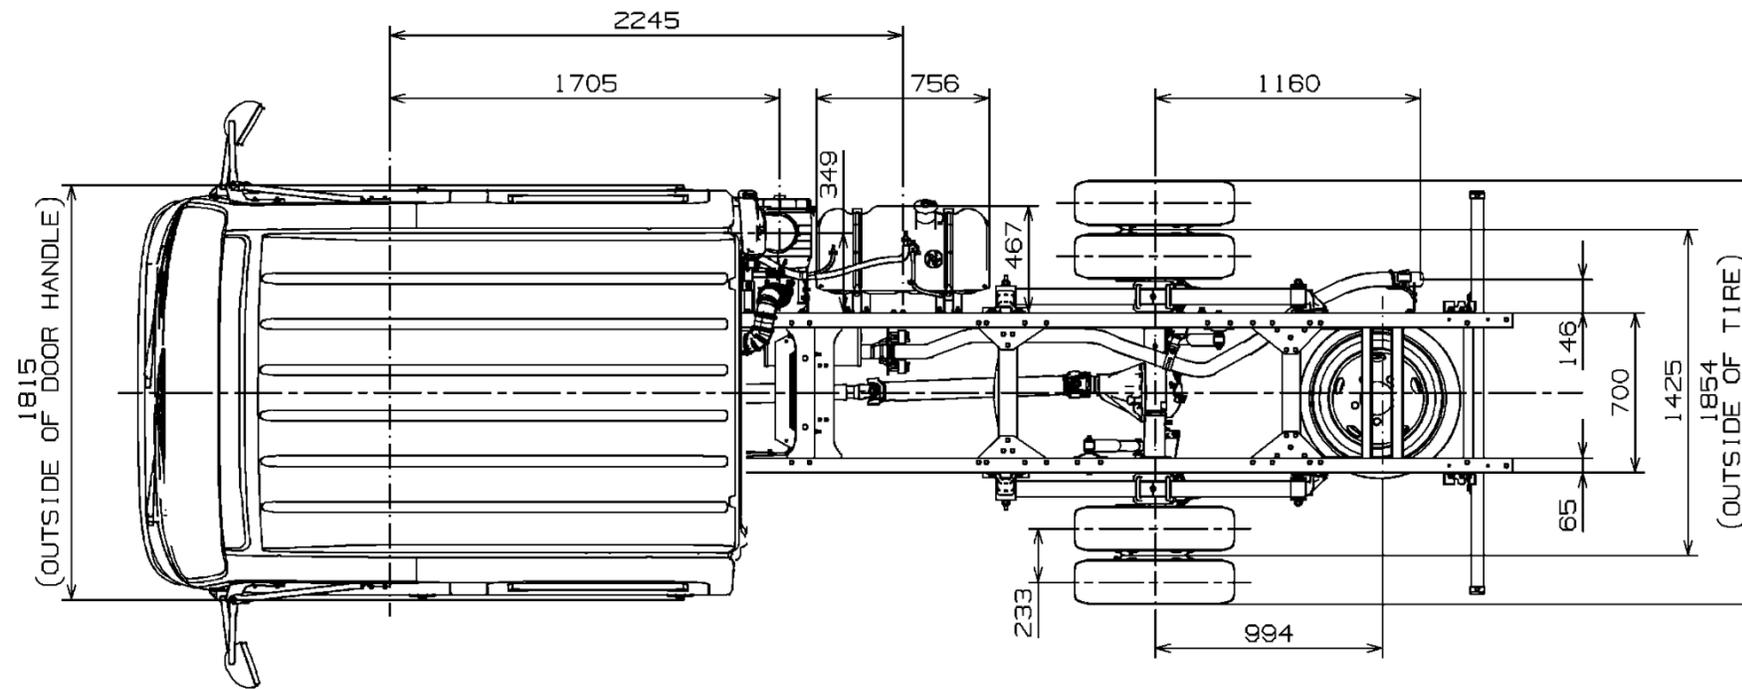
Cab Chassis Drawing NMR85L/U-EH5AYEN
